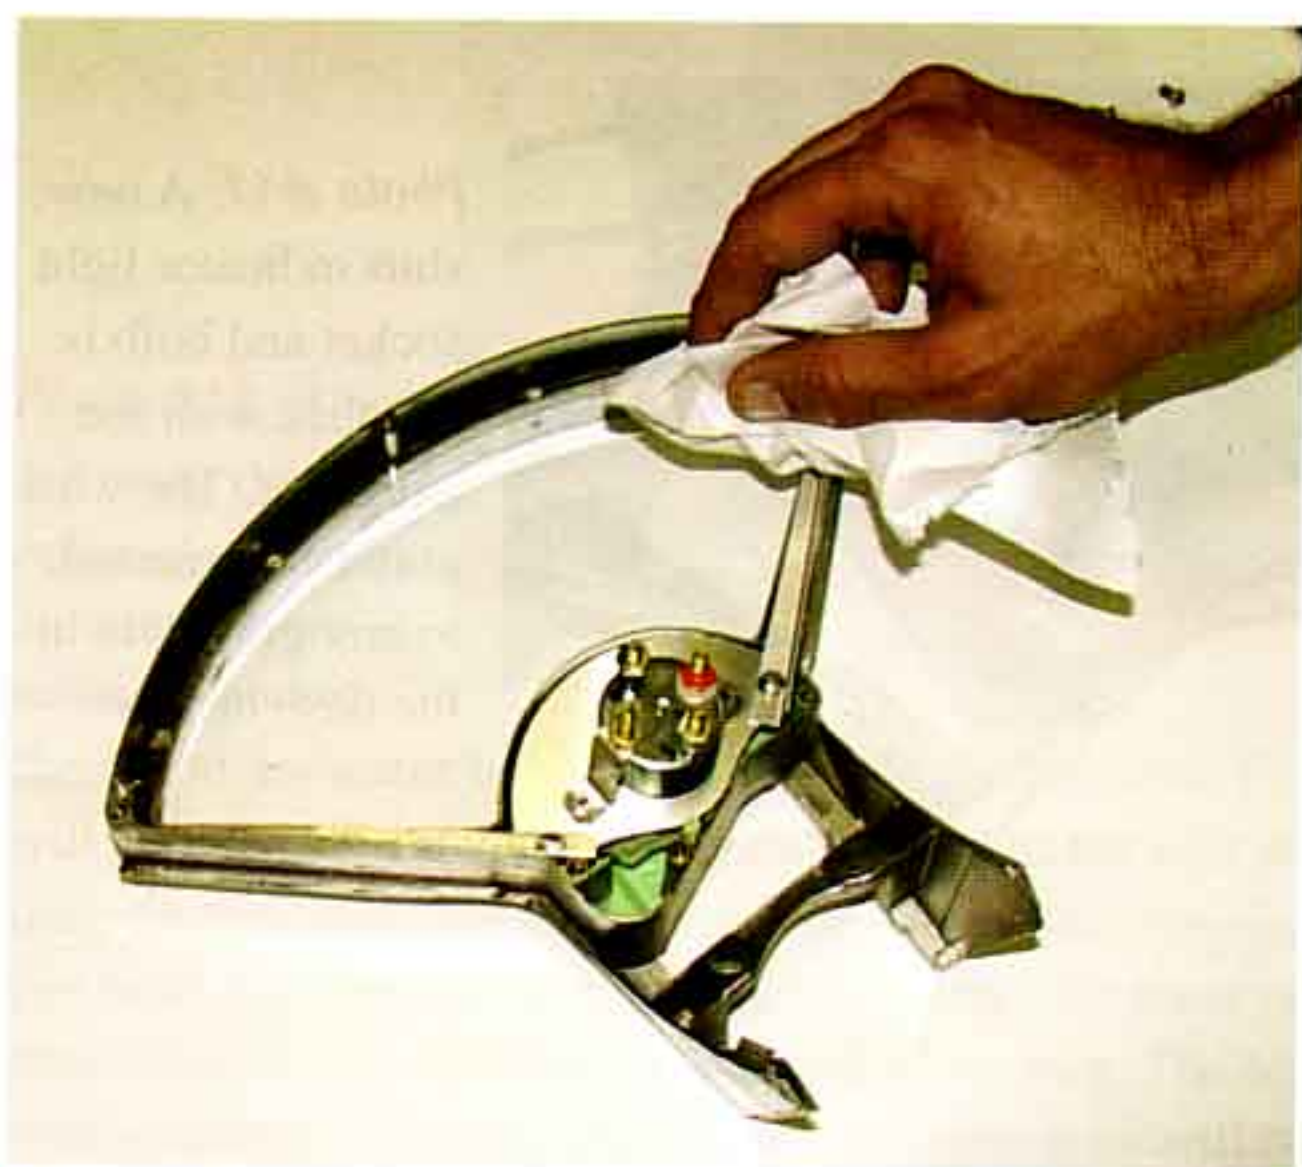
The pointer indicator housing will be used to hold the lens in place but the pointer will need to be removed if the new optional electronic
